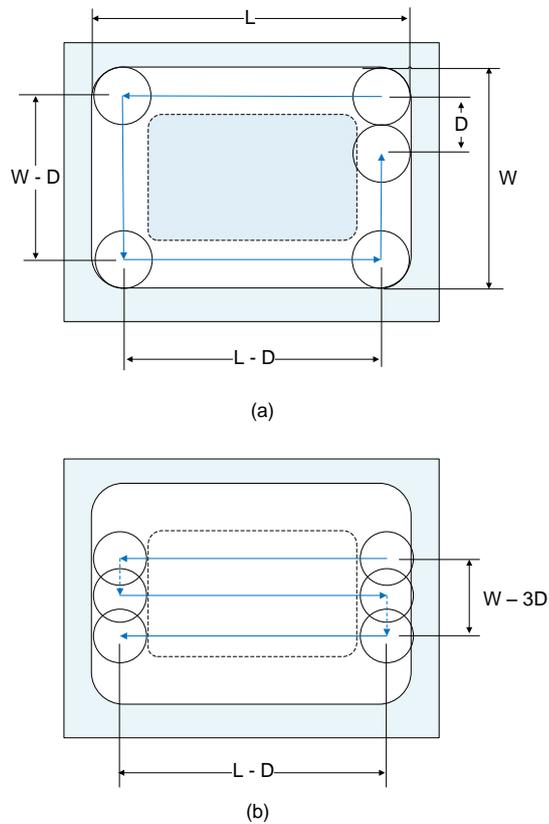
Cutting tool paths during machining of a closed pocket
